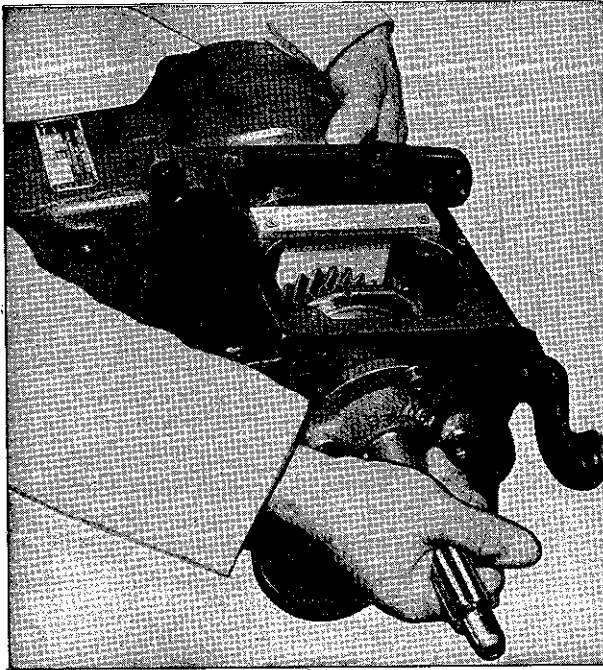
MAINSHAFT RETAINING PLATE W-194
